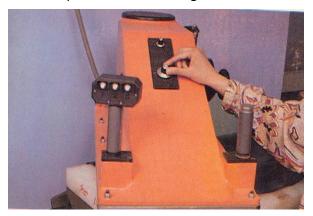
If the knife cuts deeply into the nylon board reduce the pressure.
